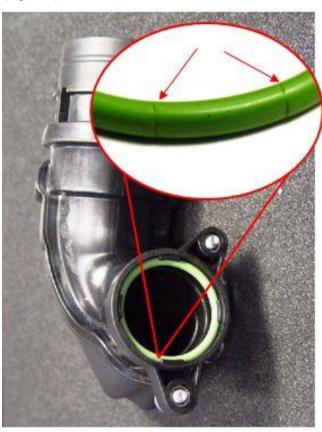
Example of imprints and damaged seal on Turbocharger Air Intake Hose.
